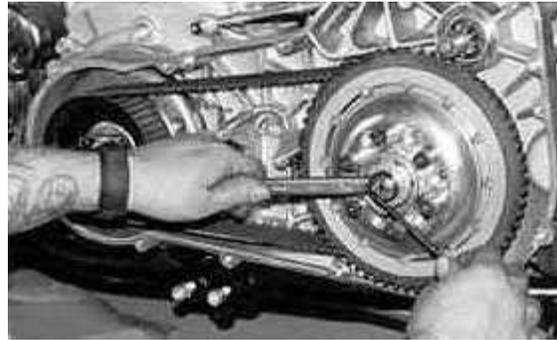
Install clutch adjusting rod supplied with kit 1986-up. and adjust clutch.
